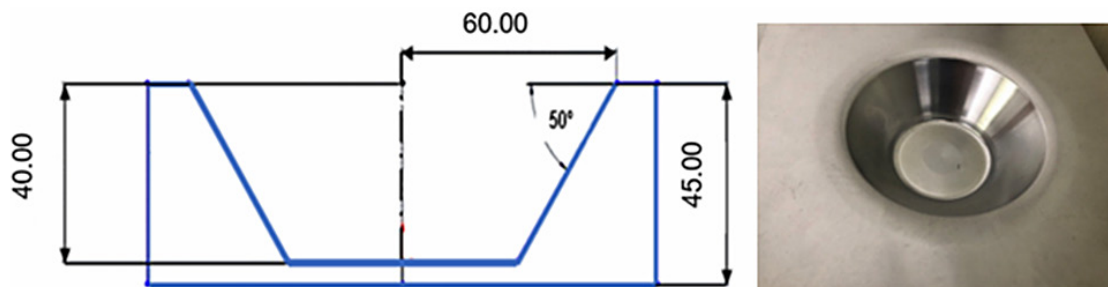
Part geometry and CNC-part programme. All dimensions are in mm
